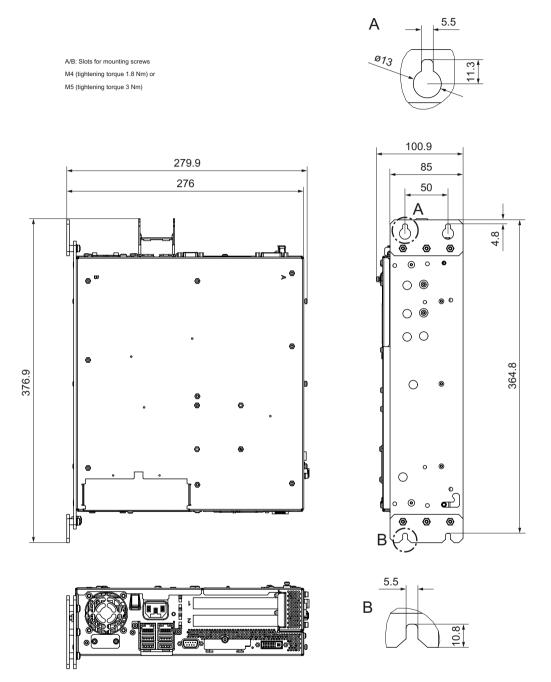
Dimension drawing for the upright mounting of the PCU 50.5 (power switch at the top)
